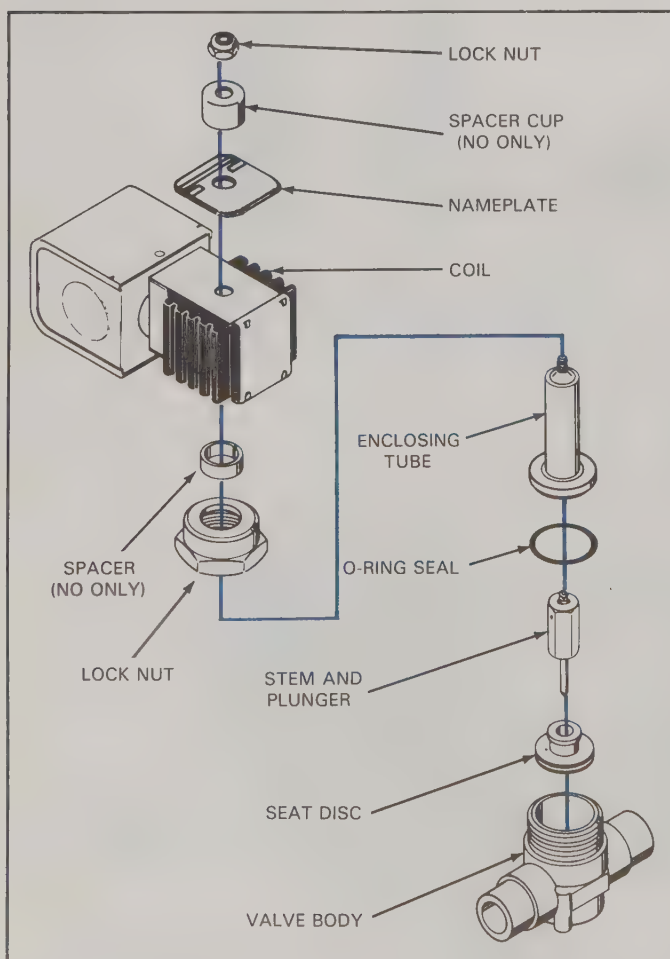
Internal parts of the solenoid, shown in this exploded view, should be removed before brazing. This will protect them from heat damage when the body is brazed to the tubing. (Sporlan Valve Co.)
